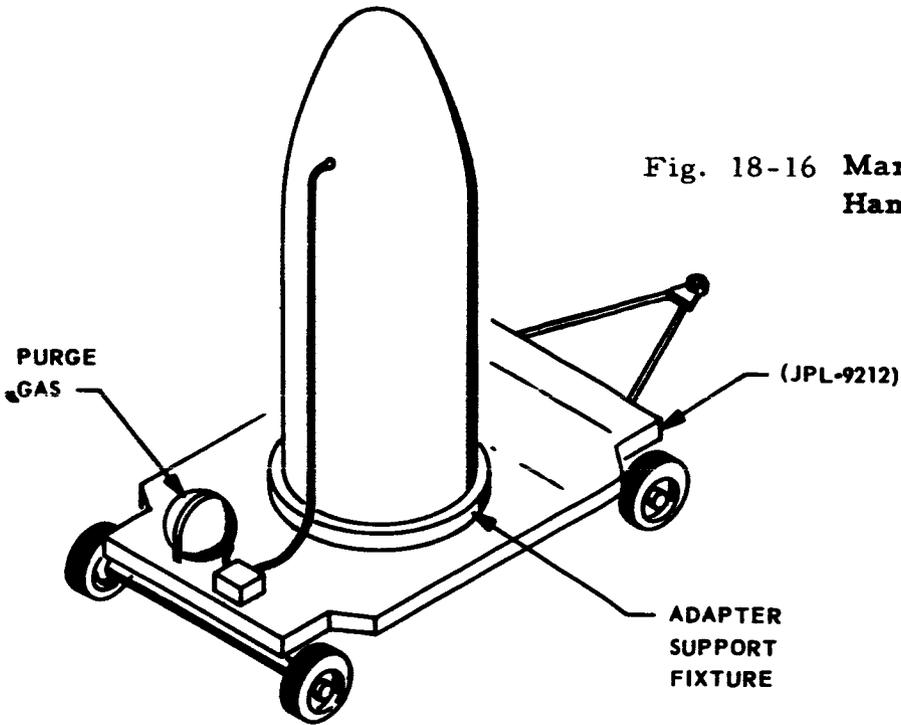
Mariner D Spacecraft Handling Dolly
